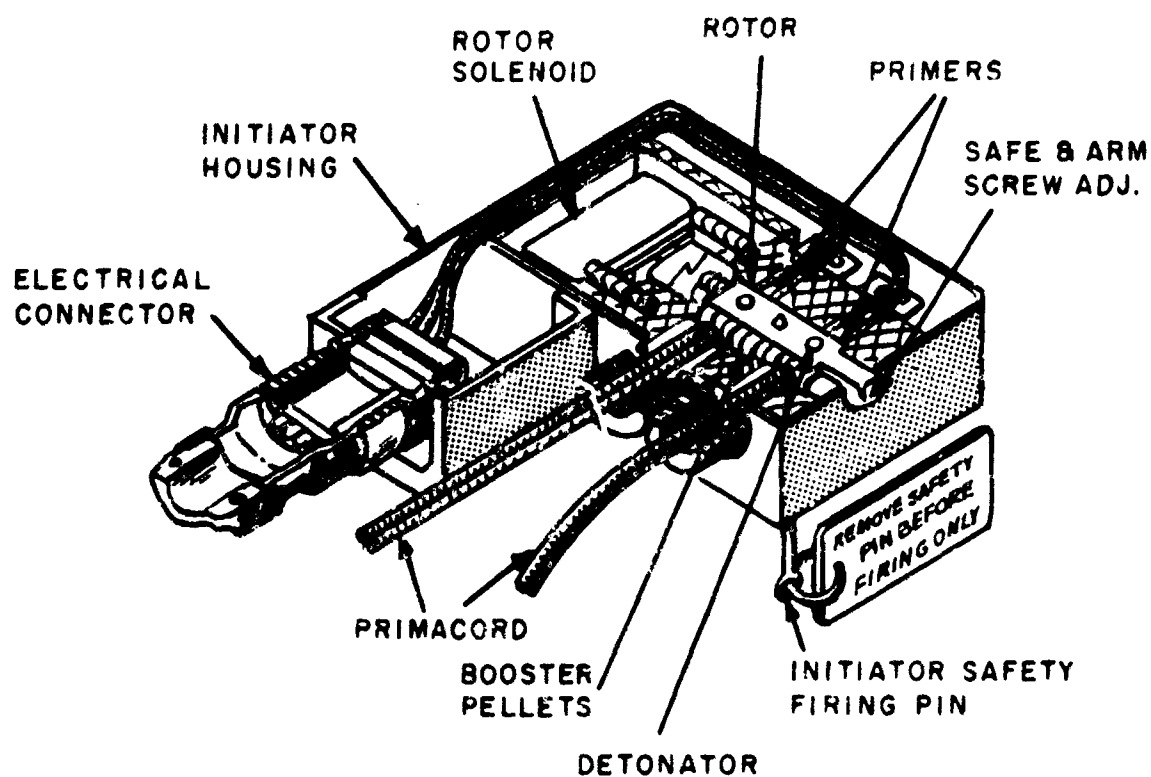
MISSILE DESTROY ASSEMBLY
